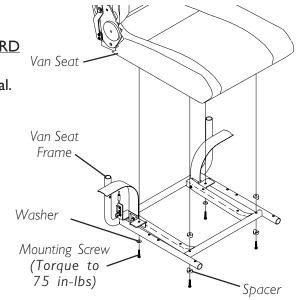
REMOVING/ INSTALLING VAN SEAT ASSEMBLY
